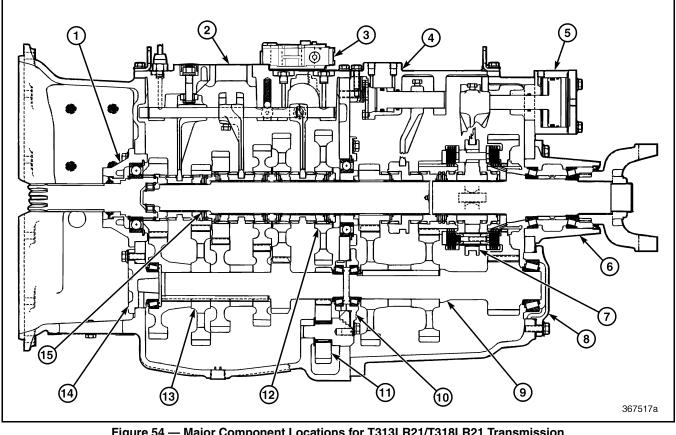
Major Component Locations for T313LR21/T318LR21 Transmission
